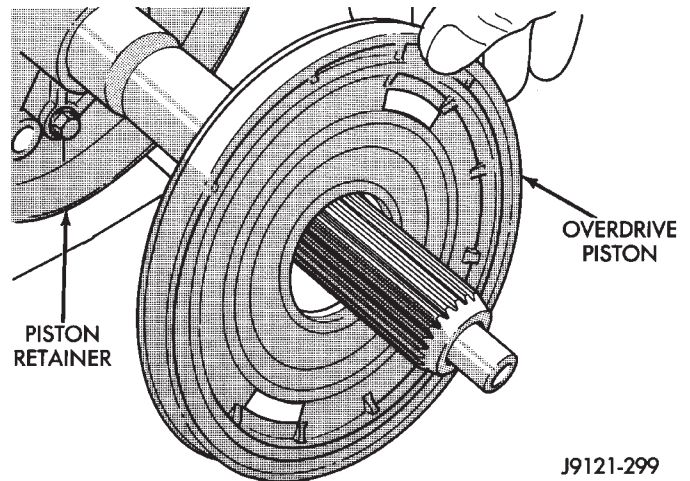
Overdrive Piston Thrust Plate Removal/ Installation
